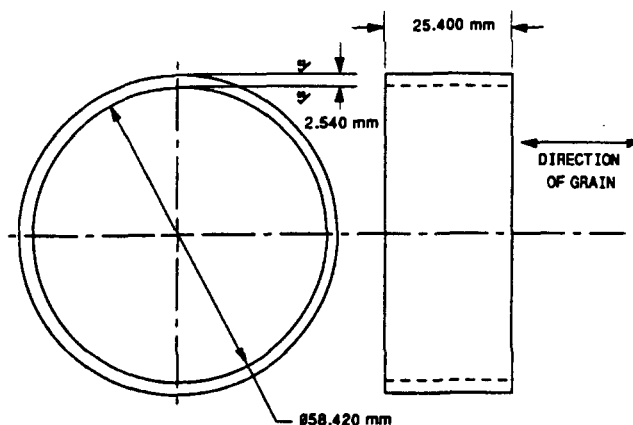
Dimensional requirements of Type 2a smooth ring specimens (reprinted from ASTM F 519, Type 2a).
